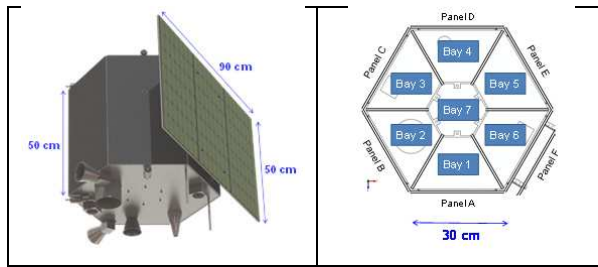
The CAD drawing of the exterior of DebrisSat without MLI (left) and the top-view layout of the structure (right).
